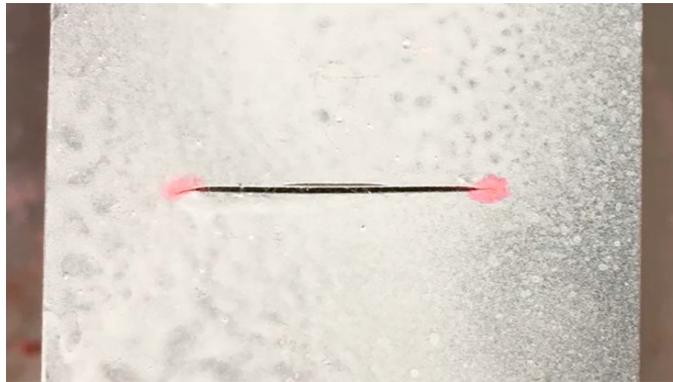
A fatigue crack highlighted by the dye penetration test for a specimen with the type 1 notch.
